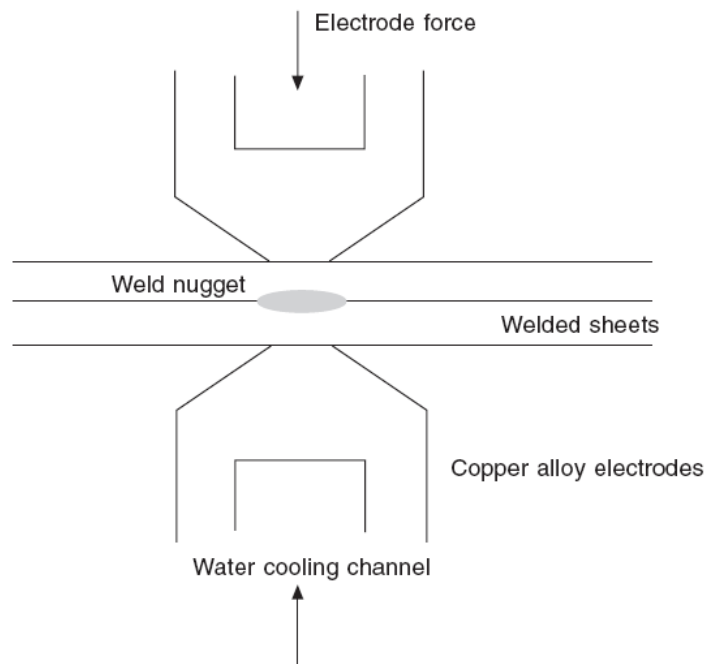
Spot-weld manufacturing process [11]
